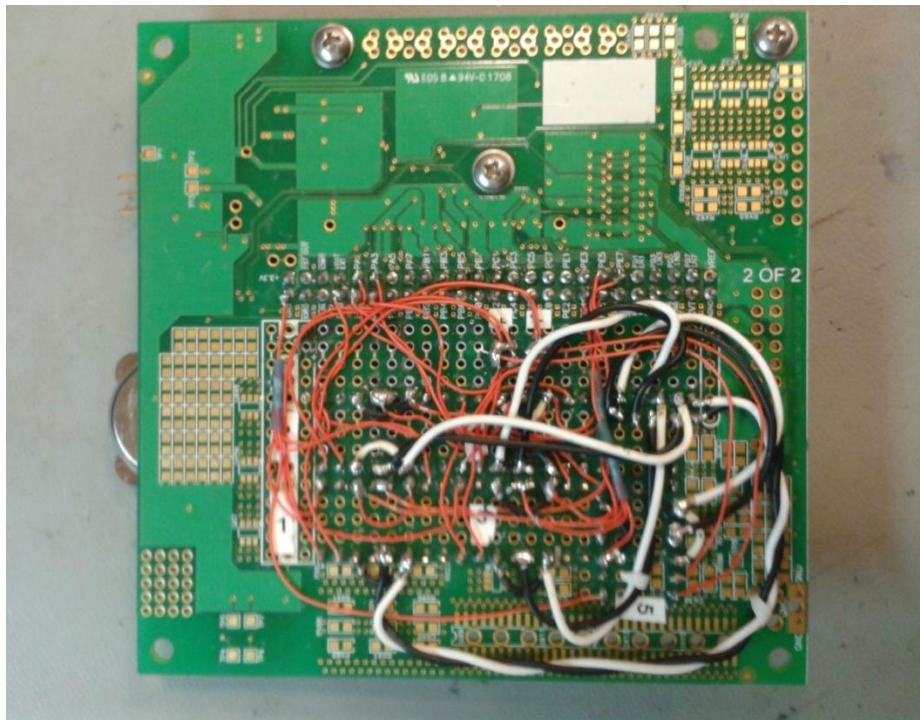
Cabling Work Done at the Back Side of the Prototyping Board
